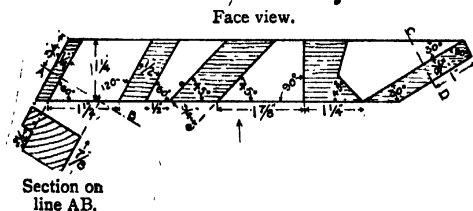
OBLIQUE SAWING AND CHISELLING.
